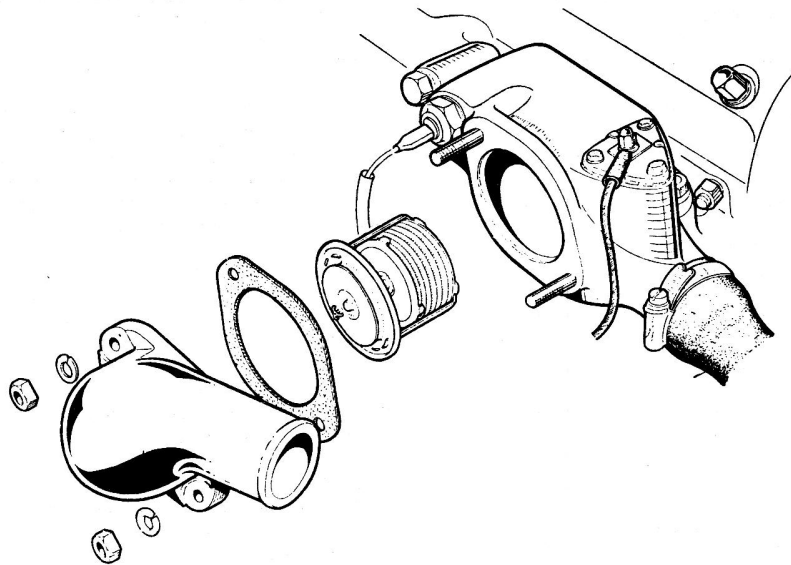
Exploded view of thermostat and housing (3.4 litre Mk.2 illustrated)
